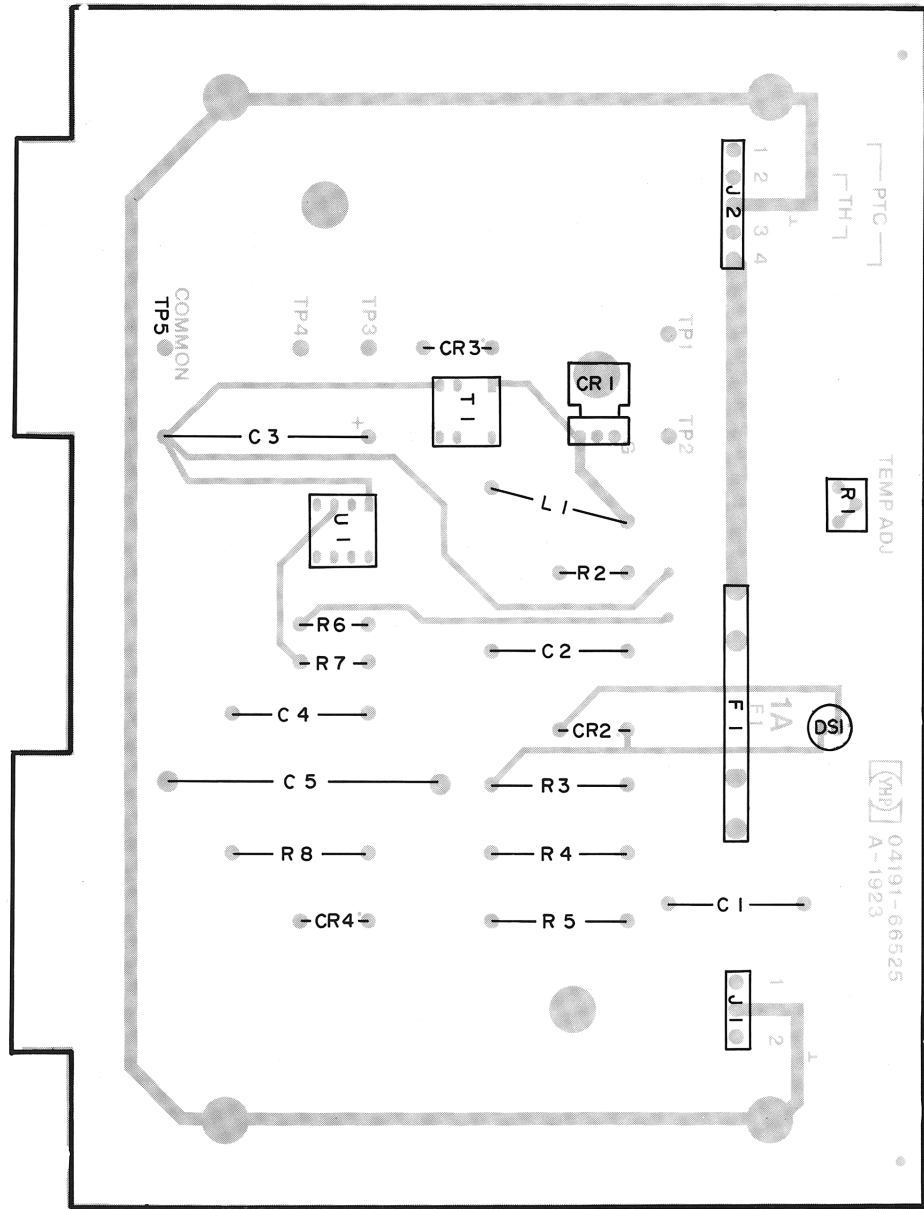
A25 Heater Controller Board Assembly Component Locations.
